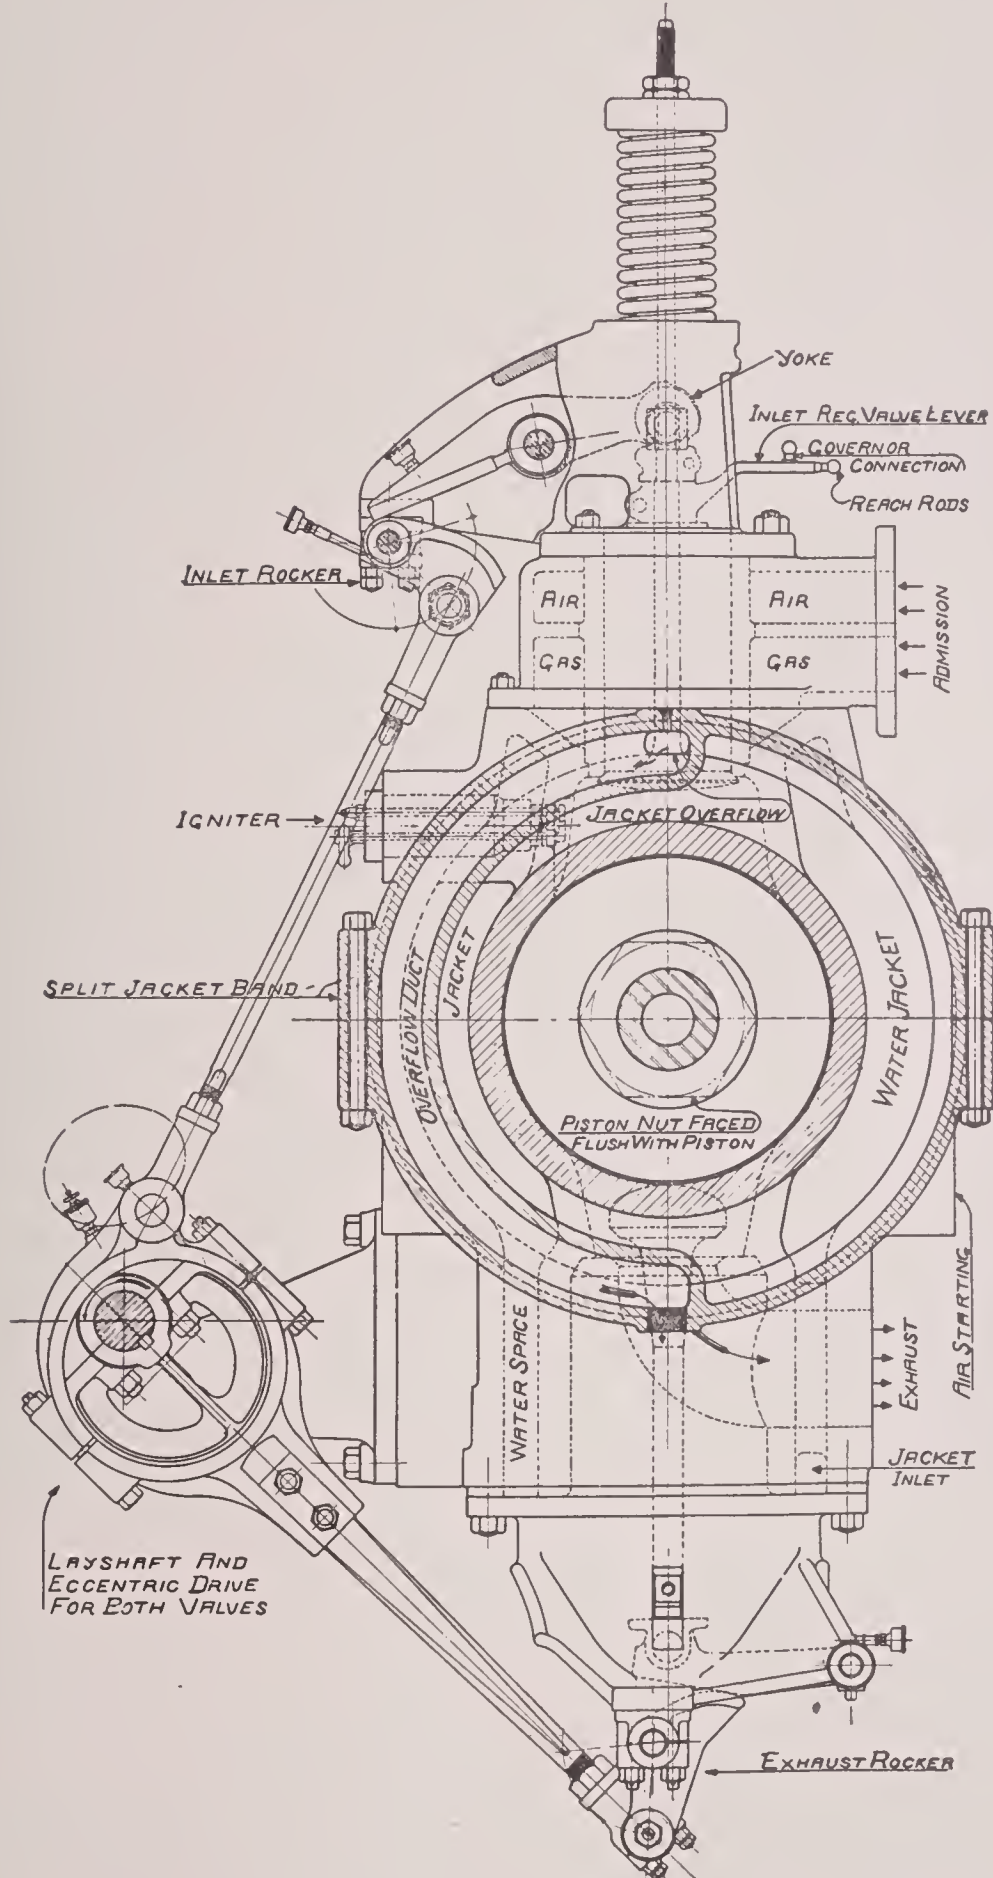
Cross-section through Cylinder, Westinghouse Horizontal Engine.
